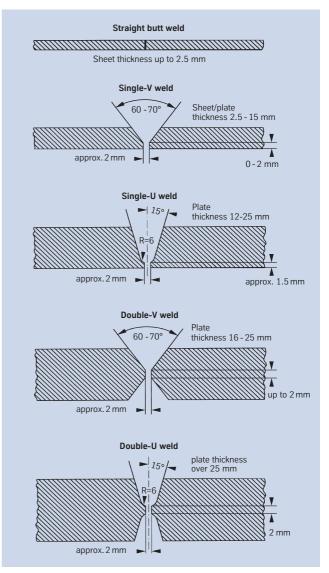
Edge preparation for welding of nickel-base alloys.
